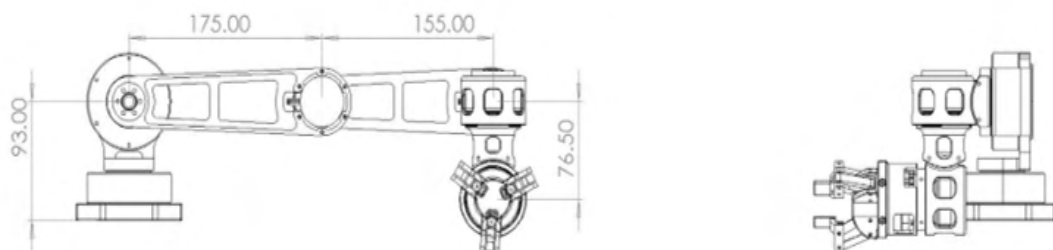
6 DOF Robotics arm engineering drawings – front and side views
